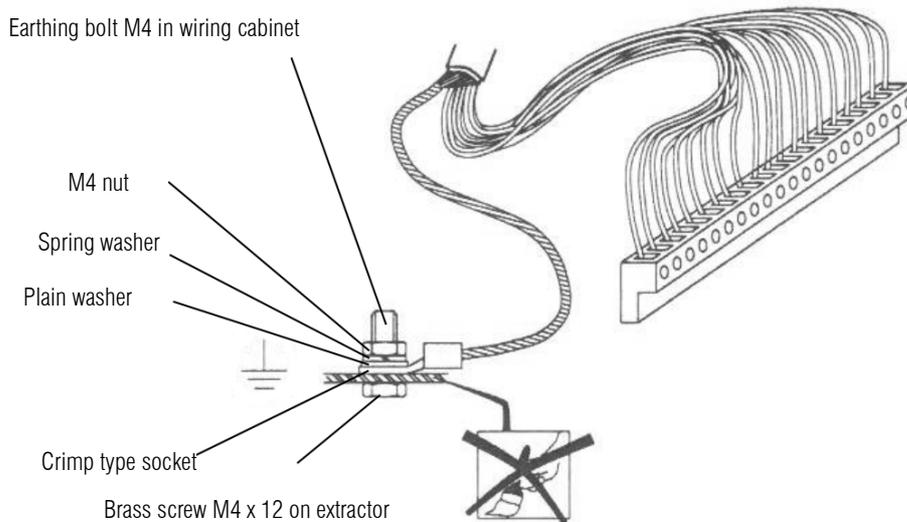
Shielding in wiring cabinet and on extractor for spiral cable
